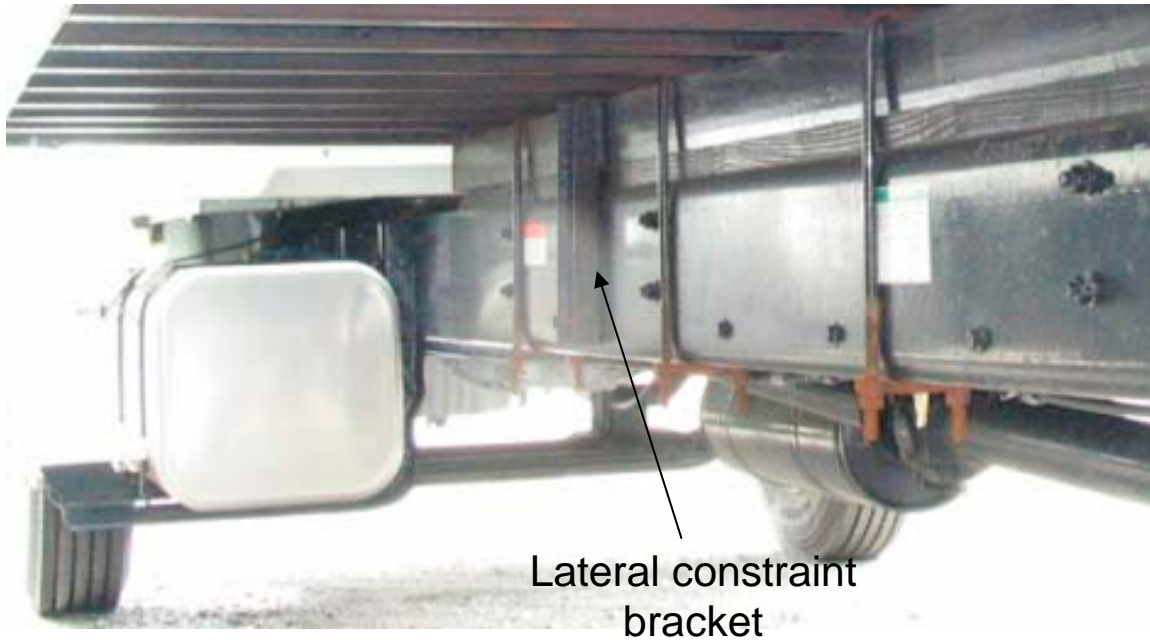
C-channel welded to bed-frame and bolted to main frame-rail for lateral support.
